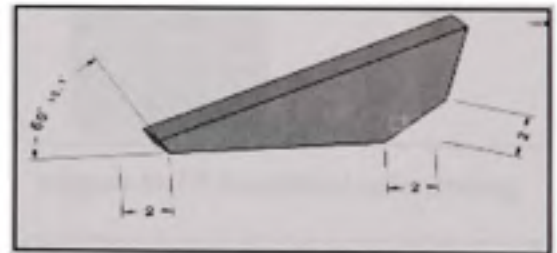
Chamfers, chamfers specified by note, intersecting surfaces.
